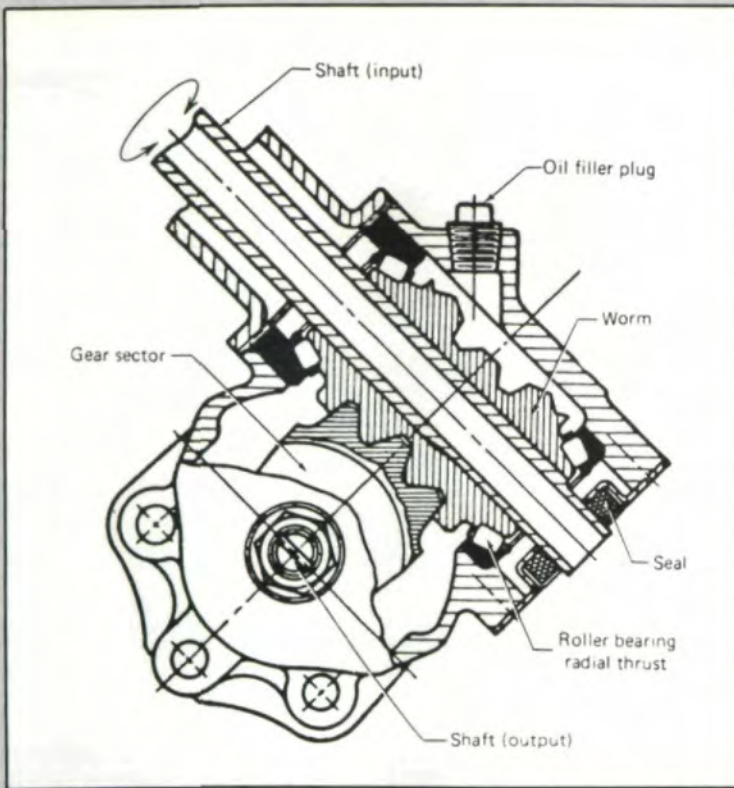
Steering mechanism. Note that only a gear sector is needed. (Courtesy The Timken Company.)
